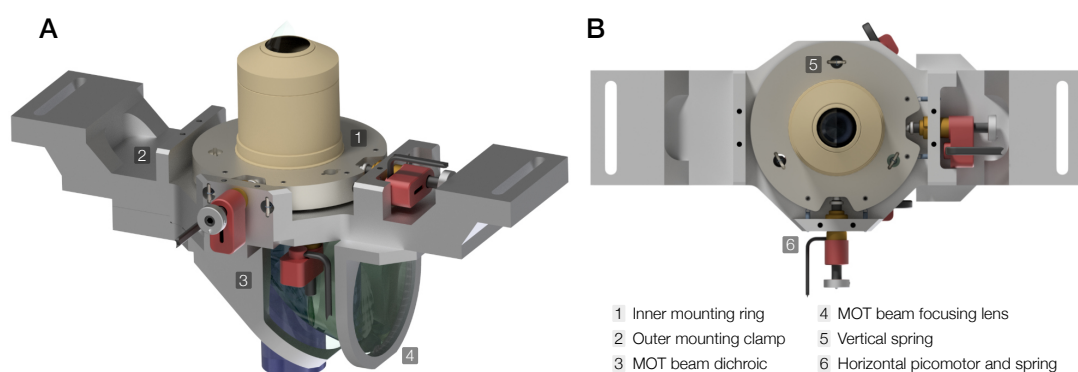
| Design of the second bottom objective mount. A Similarly to the first design, the objective is mounted inside a titanium-ring, which is held in place by picomotors to adjust its position and angle. Due to the limited space in between the coils, the outer mount is shaped in form of a bracket. The dichroic that separates the imaging and tweezer beams from the bottom MOT beam as well as the focusing lens are firmly attached to the mount. B Top view of the objective mount. The vertical picomotors and springs are aligned at equidistant angles, such that the symmetry is only broken by the horizontal picomotors.
